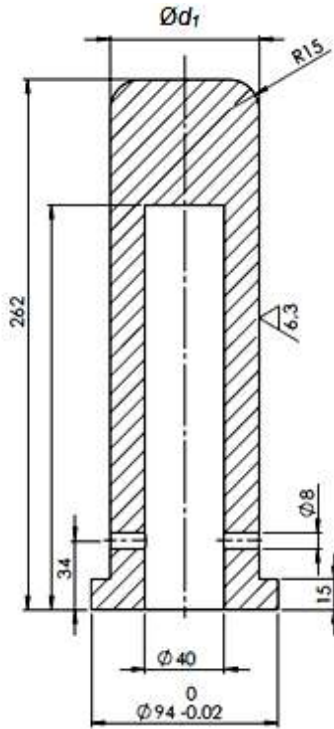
Technical drawing of punch with standard dimensions for each drawing ratios
